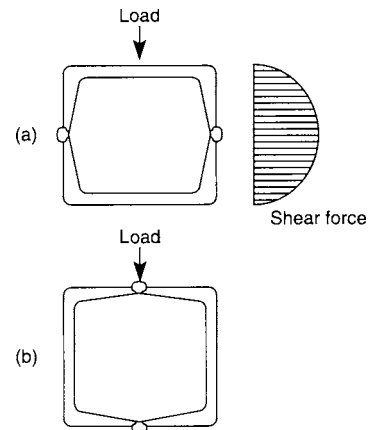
Design options for placement of welds. (a) Welds at neutral axis; (b) welds at outer fibers.
